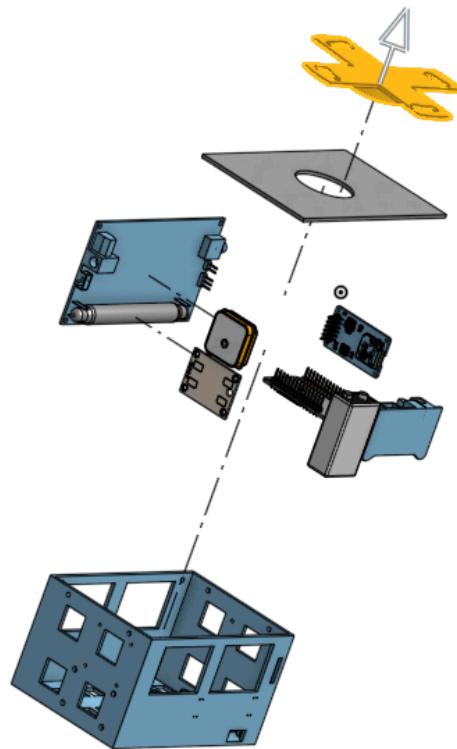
Exploded assembly view of the payload including the housing structure.
